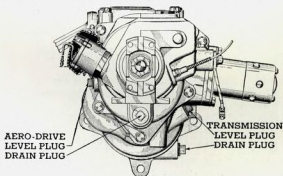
Rear View of Transmission and Aero-Drive Unit
